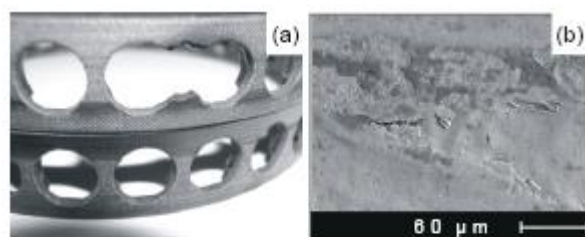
Cage breakage and raceway surface of an uncoated spindle bearing tested without lubrication.
